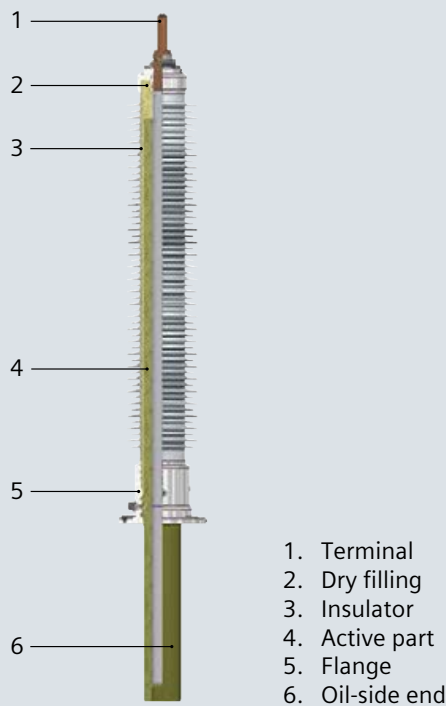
Transformer bushing – resin-impregnated paper (RIP) design – sectional view
